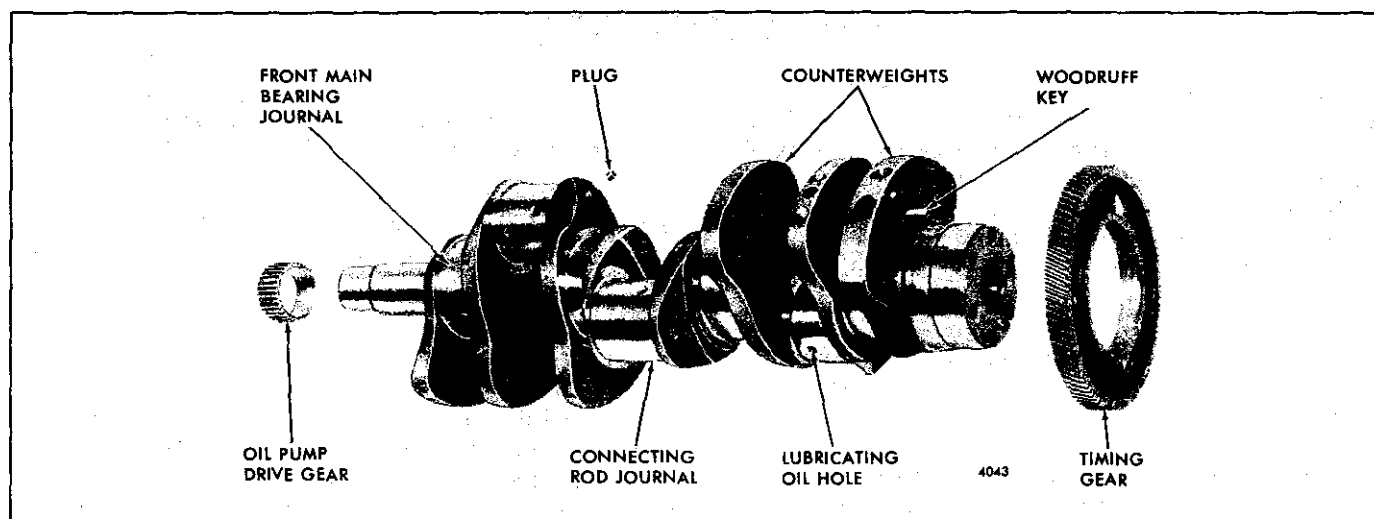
Crankshaft Details and Relative Location of Parts (6V Crankshaft Shown)
